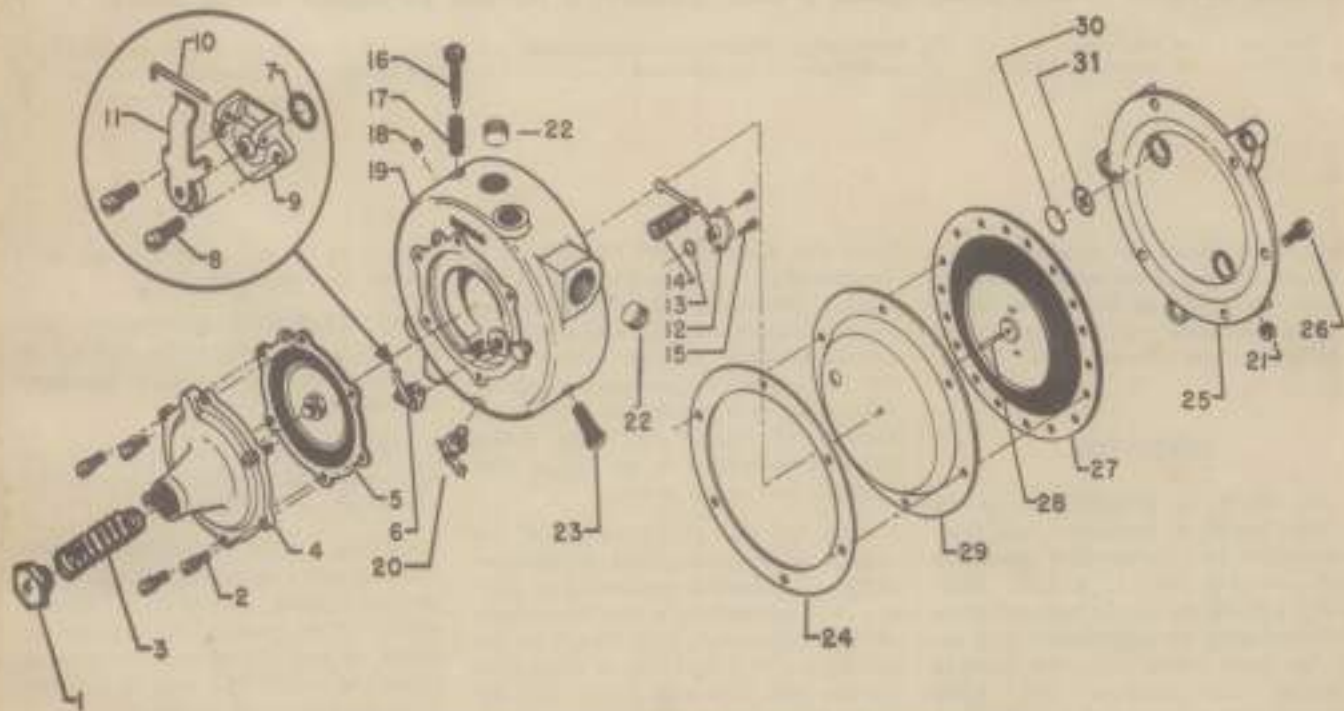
Exploded view of the Ensign Model W LP-Gas regulator.
